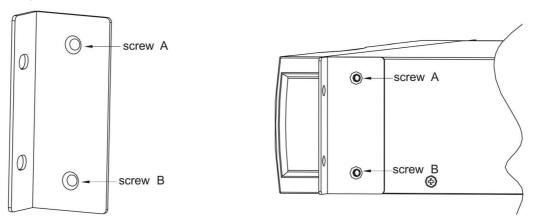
Cabinet installation bracket Fig 12 Cabinet installation bracket assembly
